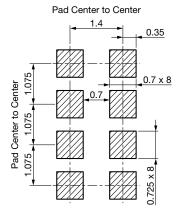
VCNL4040M3OE PCB Layout Footprint
